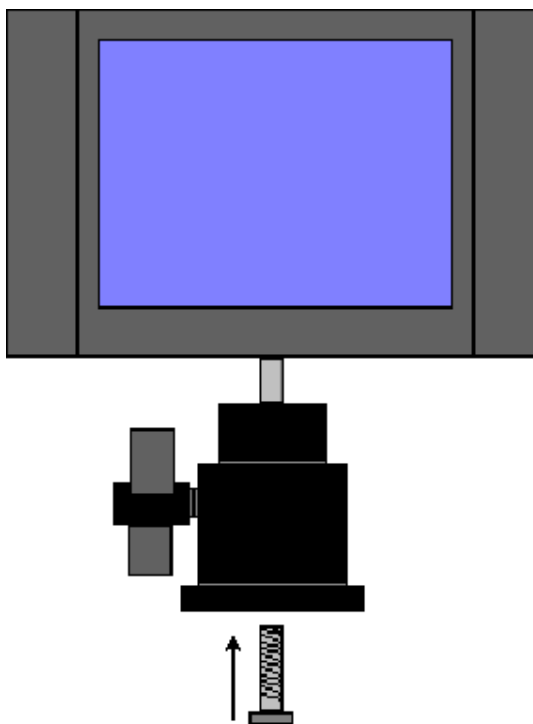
Display module with mounting pedestal. The pedestal is mounted from the bottom using one 3/8" screw.
